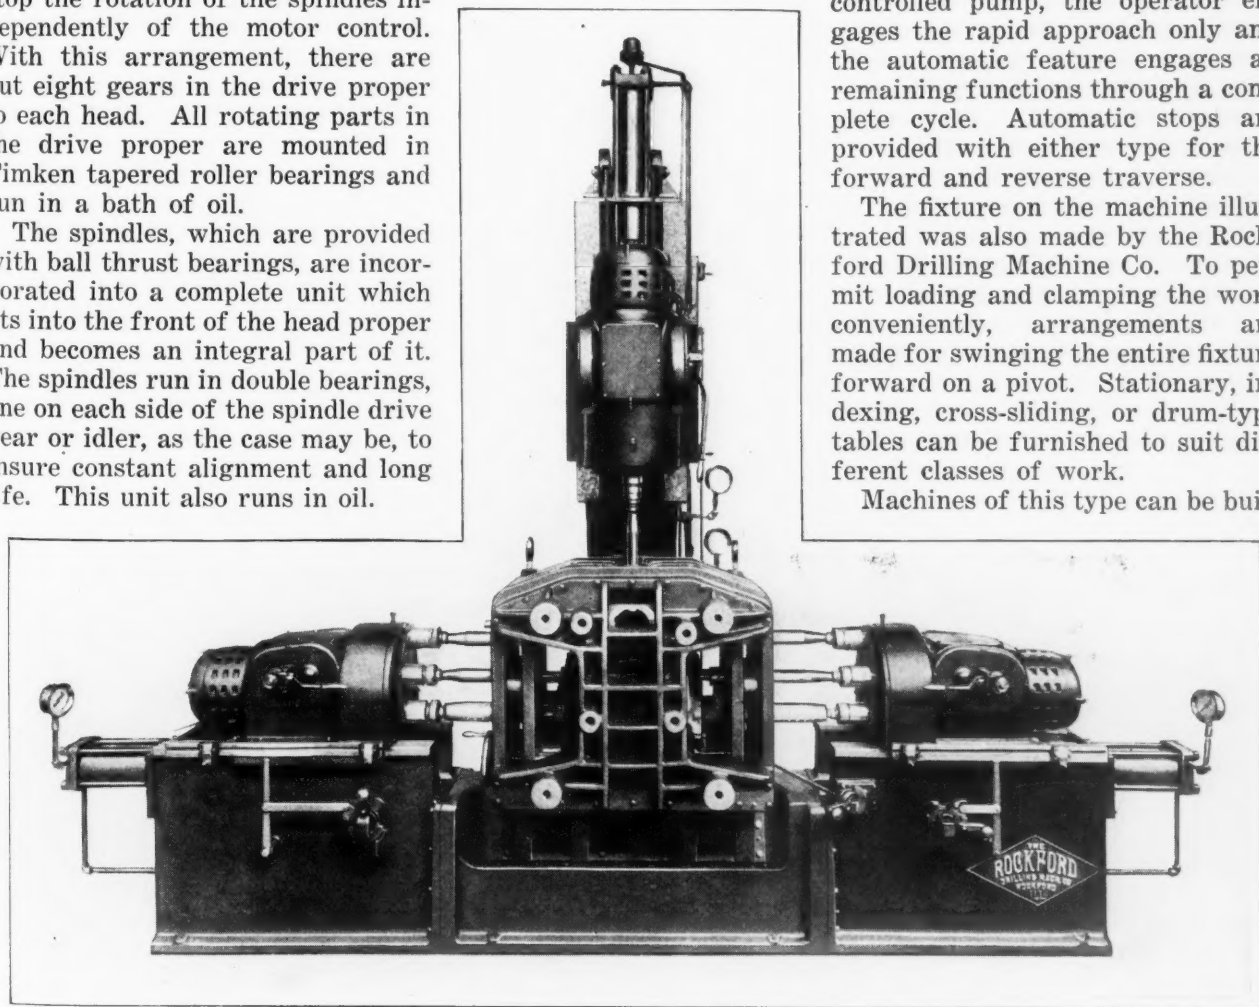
Rockford Boring Machine with Two Horizontal Heads and One Vertical Head
